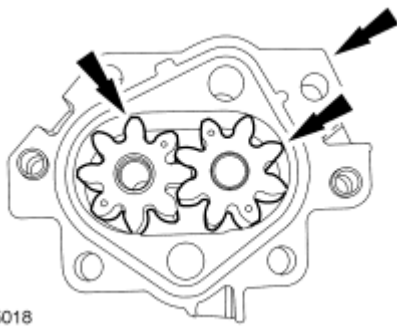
Locating Oil Pump Drive Gear, Driven Gear And Cover
